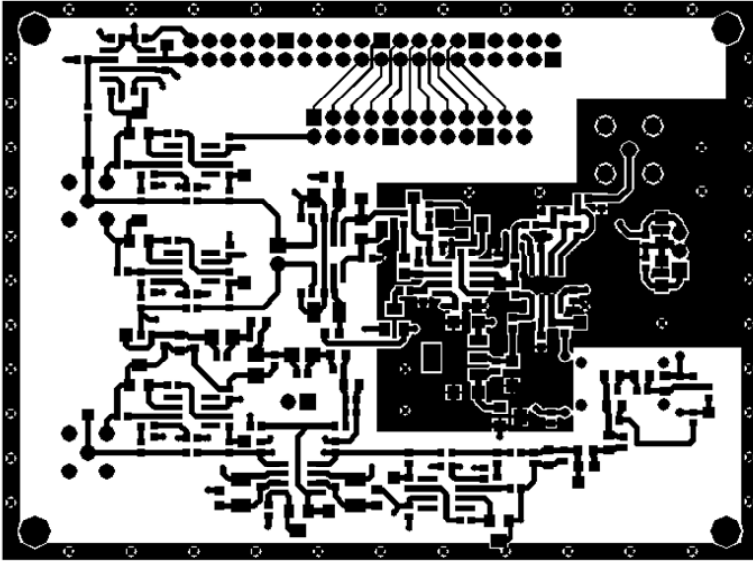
Top layer of the A-D PLL PCB designed.
